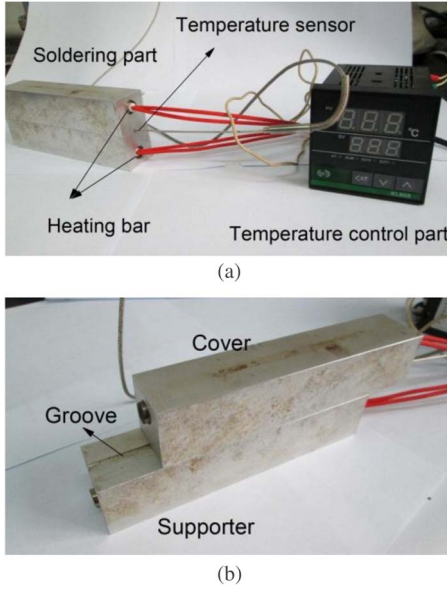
Pictures of the soldering machine, (a) the whole part and (b) the soldering part.
